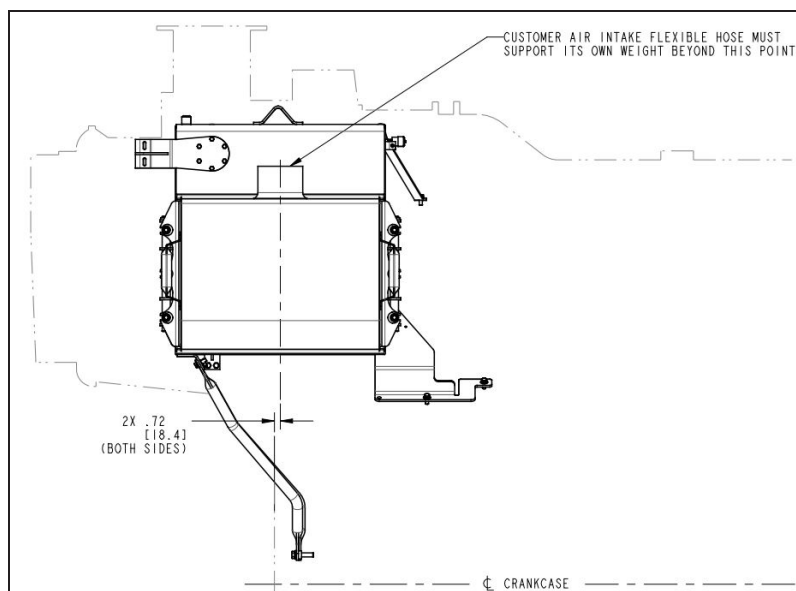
Air Cleaner Housing Modification for Remote Air Intakes
